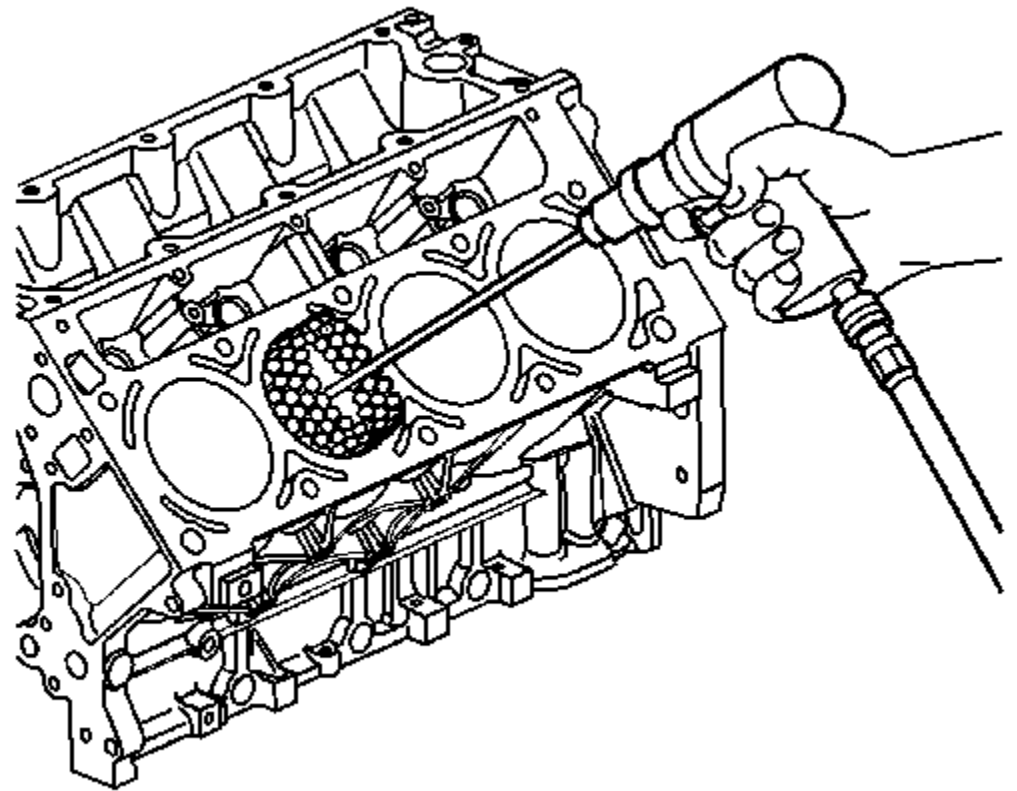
Cylinder Bore Cross-Hatch Pattern
